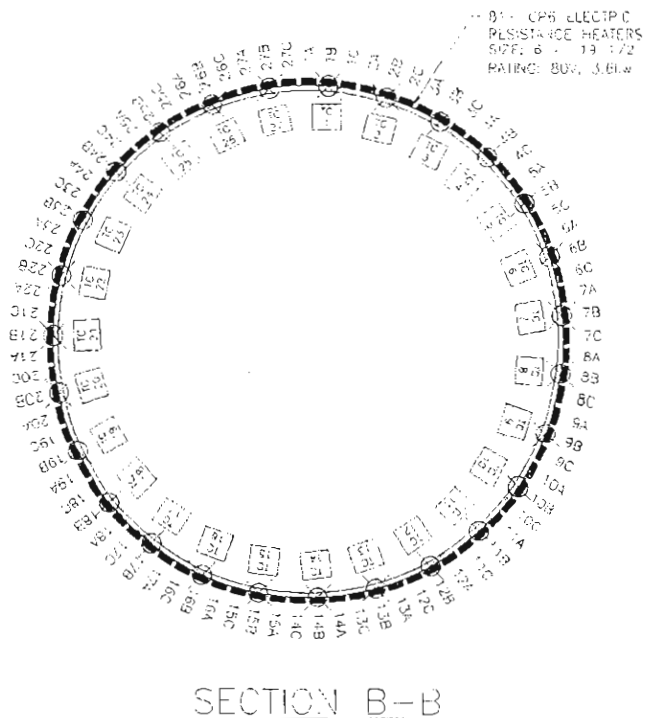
Heater and thermocouple layout for case history described in section 17.2.1 in which external electric resistance heaters were used for full circumferential PWHT of a nozzle attachment to an acid settler tank.
